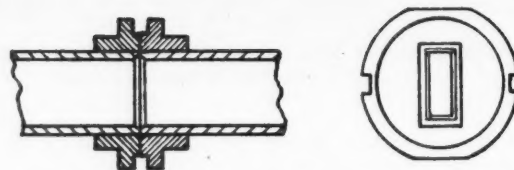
Flanged waveguides assembled with burrs removed by chamfering, producing a small cavity which causes reflection.
